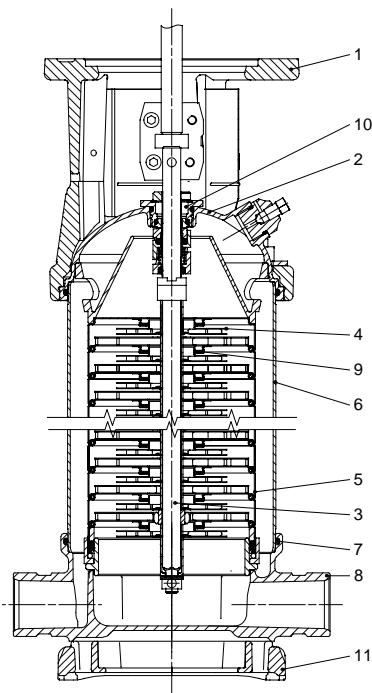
Sectional drawing of CRNE 1 and 3 HS
